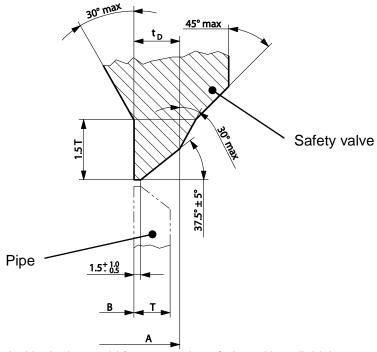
Welding end with single v weld for connection of pipe with wall thickness up to 22 mm
